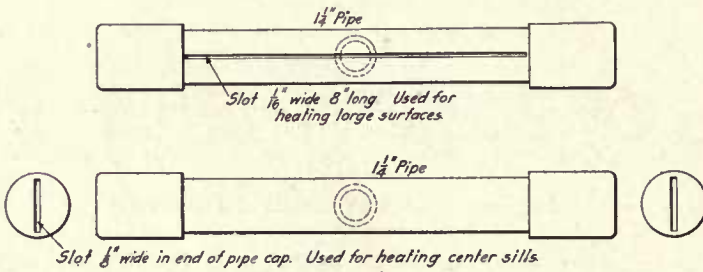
Typical End Pieces or Burners for Crude Oil Torch.
